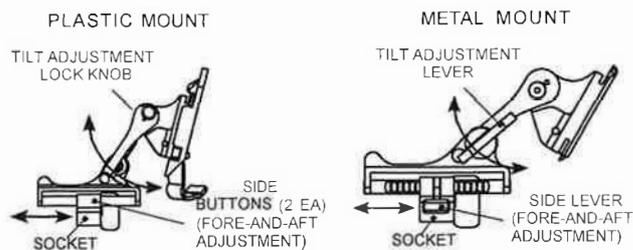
TILT AND FLIP-UP ASSEMBLY MECHANISMS
